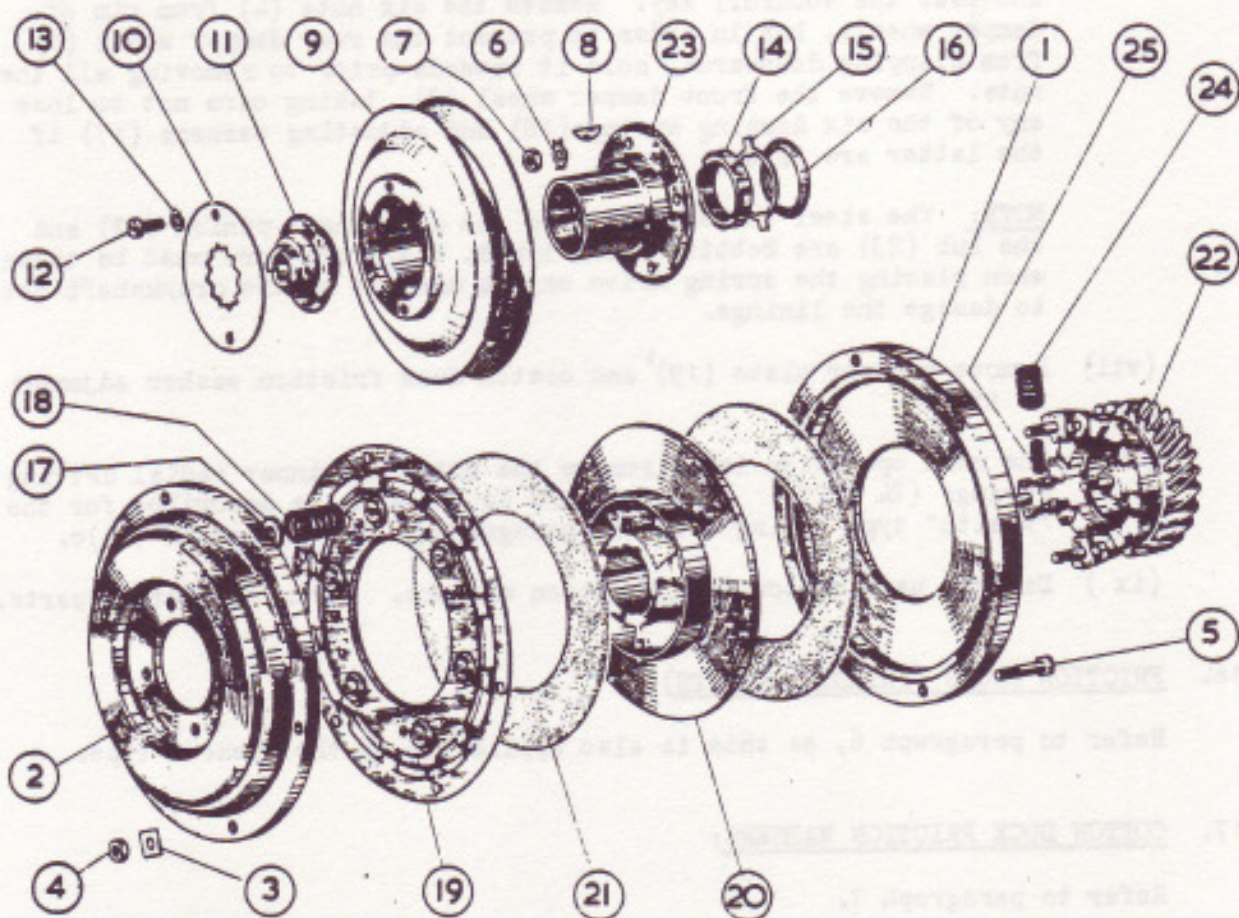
ENLARGED VIEW - SPRING DRIVE ("BENCH" TYPE).
